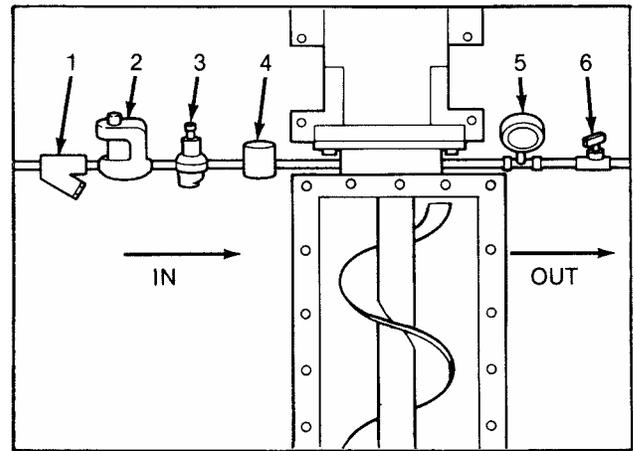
Typical water flush arrangement for units with packing includes strainer valve (1), pressure regulating valve (2), sight flow meter (3), solenoid valve (4), pressure gauge (5), and needle valve (6).
